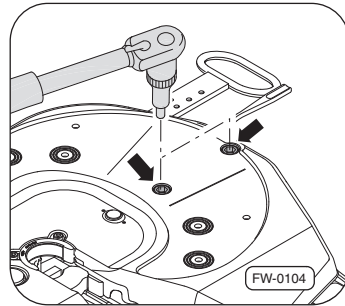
· Mounting the fifth wheel plate onto the (bearing blocks) brackets.
